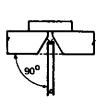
Overhead Butt Weld - Root Pass
